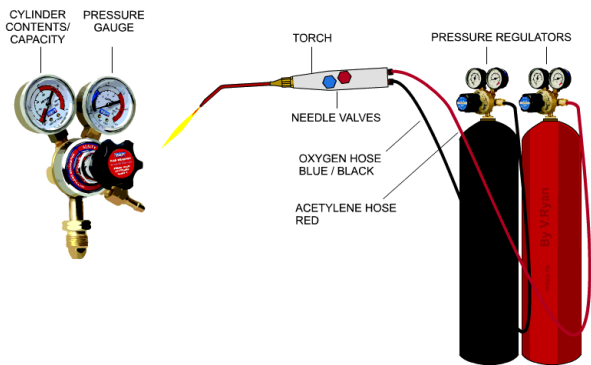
A VIEW OF GAS (OXY-ACETYLENE) WELDING
